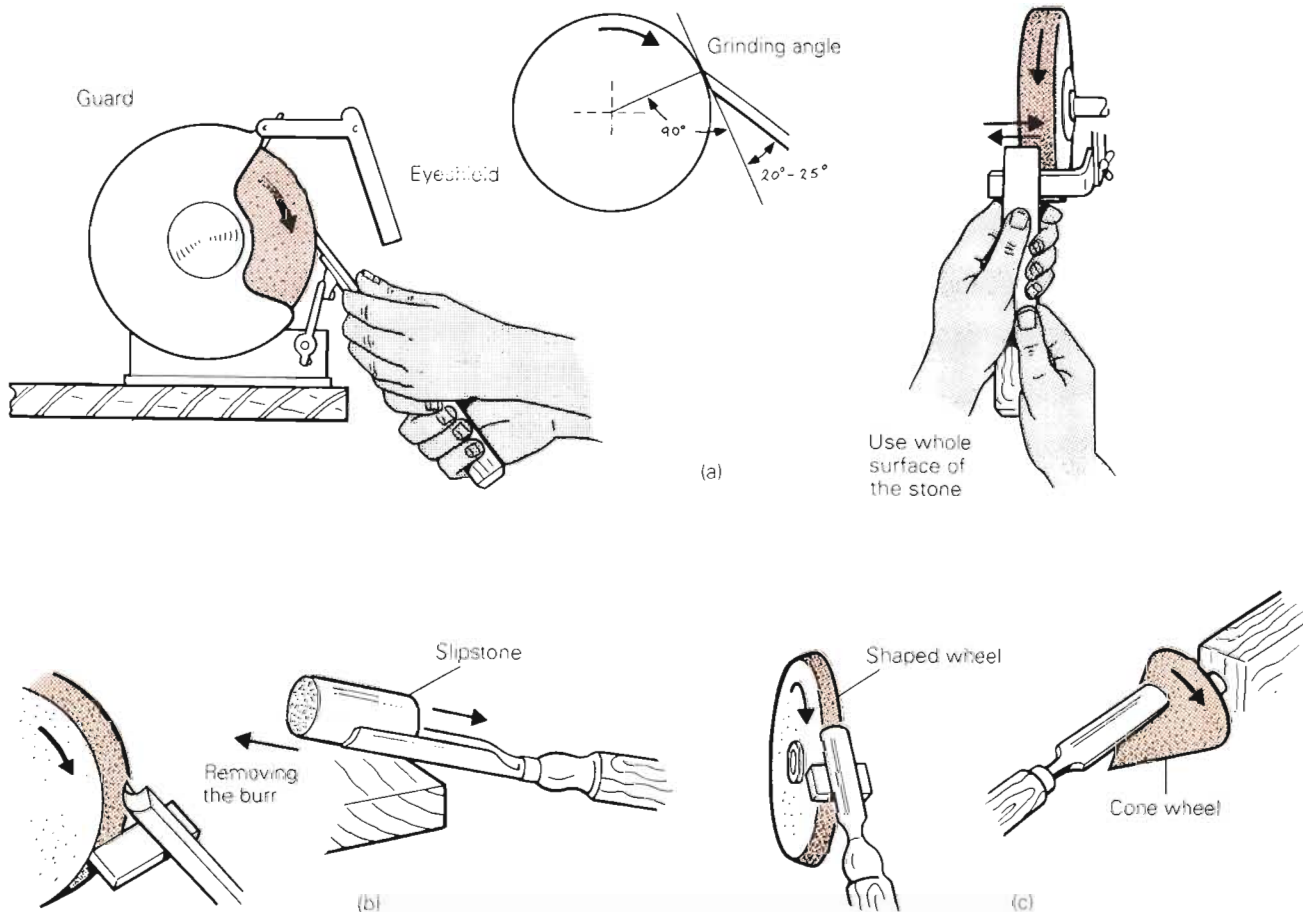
Grinding of tools: (a) plane cutting irons and chisels, (b) carving gouge, (c) scribing gouge.
